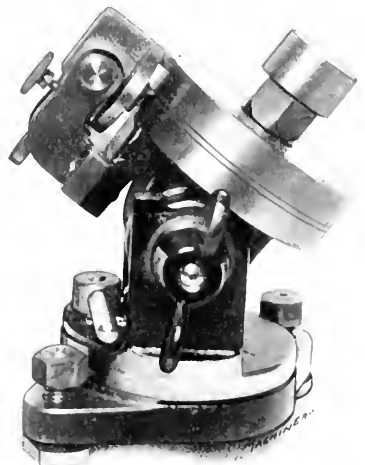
Dividing Head for Use on Schuchardt & Schütte Engraving Machine
